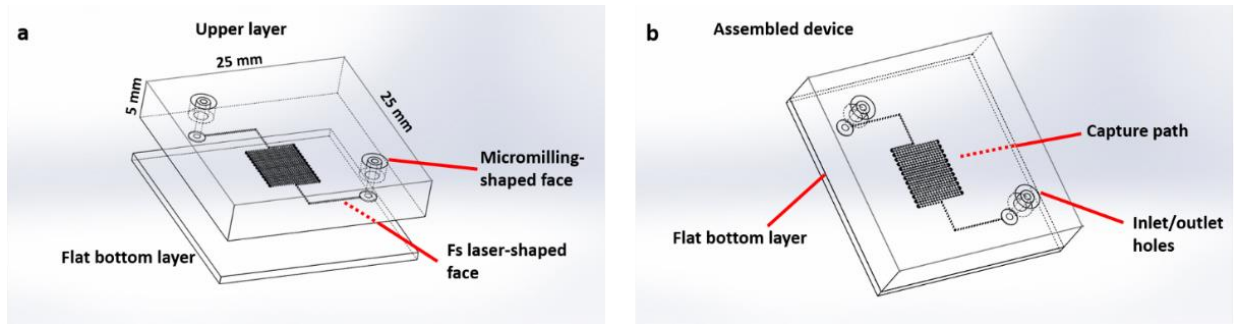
(a) modules of the PMMA device: the upper layer has been milled by both sides to obtain femtosecond pulse-shaped serpentine on the bottom and micro milling machine inlet/outlet holes on the top. A flat slice of PMMA sealed the serpentine channel; (b) architecture of the assembled device.
